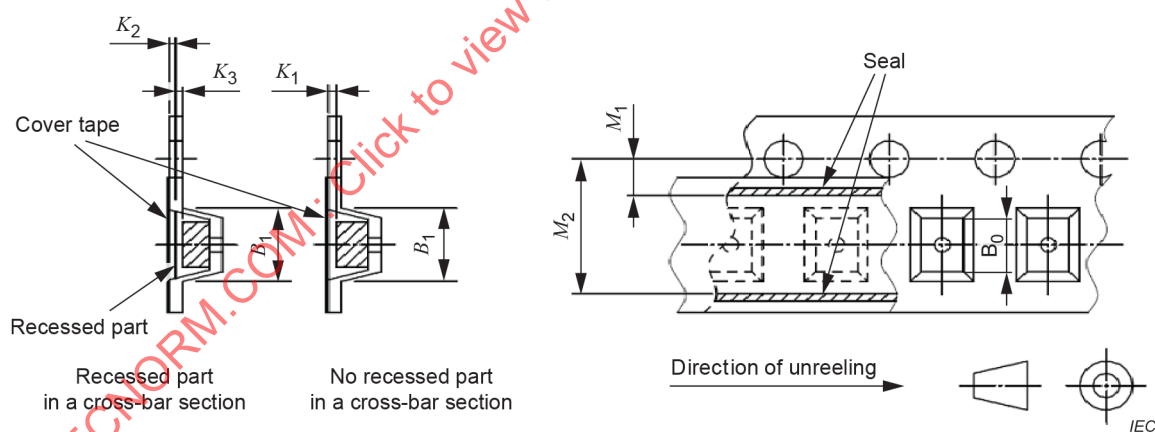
Specified dimensions for emboss taping for Auto Loading Feeder
